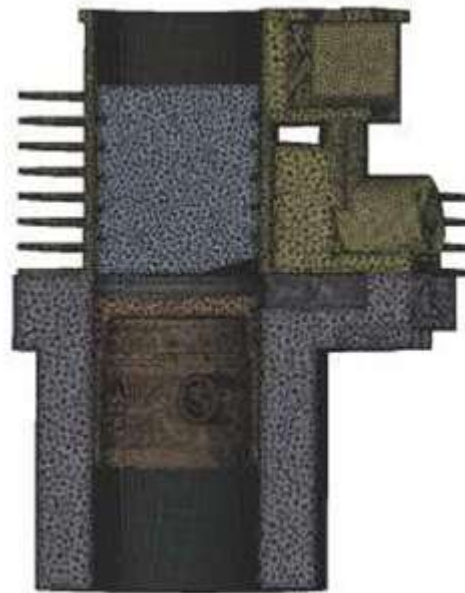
Mesh employed in the thermal analysis for the assembly piston, liner and cylinder head without Cu coating
